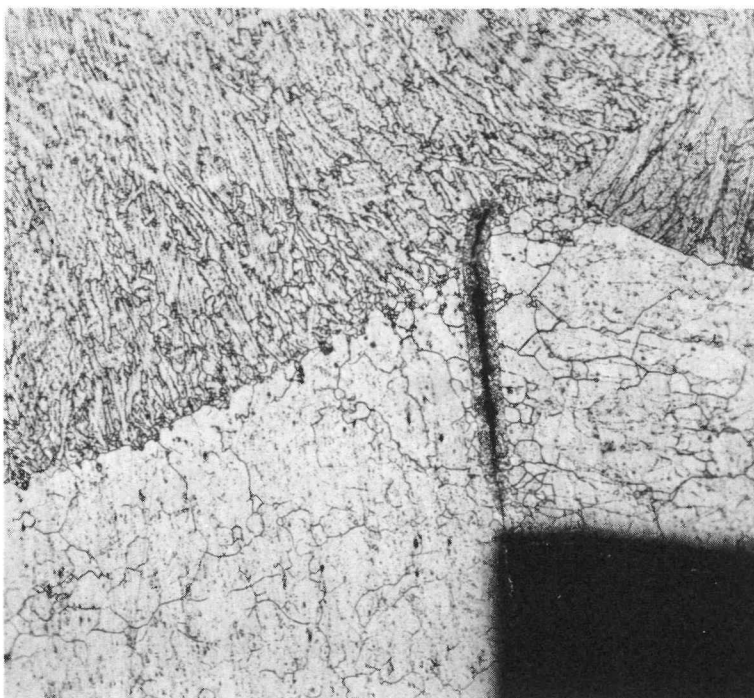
ELECTRON BEAM WELD ON SPECIMEN 1; MAGN 64X
